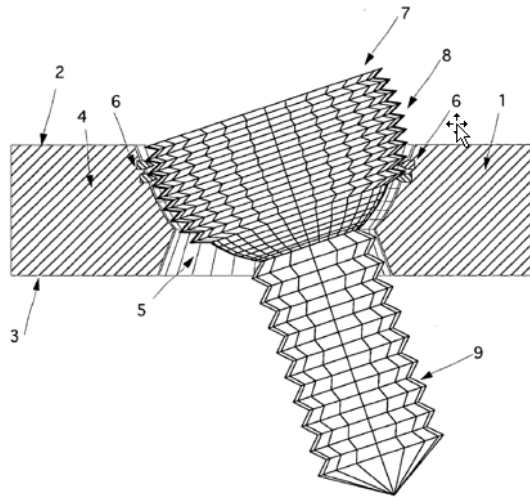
is a sectional view of screw 7 driven through hole 5 of bone plate 1, into bone underneath plate 1 (not shown), and locked at a tilt. *Id.* ¶¶ 27, 29, 30. Screw 7 has head 8, which “is threaded with a constant pitch.” *Id.* ¶ 30. Further, the wall of plate hole 5 “has a small number of isolated protrusions 6 (such as pegs or spikes), which number is within 2 and 30, designed to lock against the threaded spherical head of the screws 8.” *Id.* ¶ 32. “[O]nce the screw 7 has been driven in, it locks tightly against the protrusions 6 . . . in either perpendicular or tilted position,” with “up to 20 degrees of angulation in any direction” being allowed. *Id.* ¶ 33.
